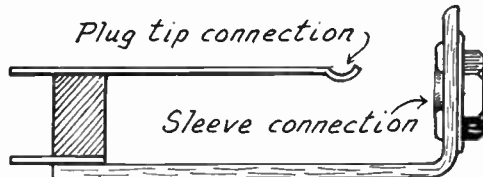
Mounting Bracket Used as Sleeve Connection for Jack.
